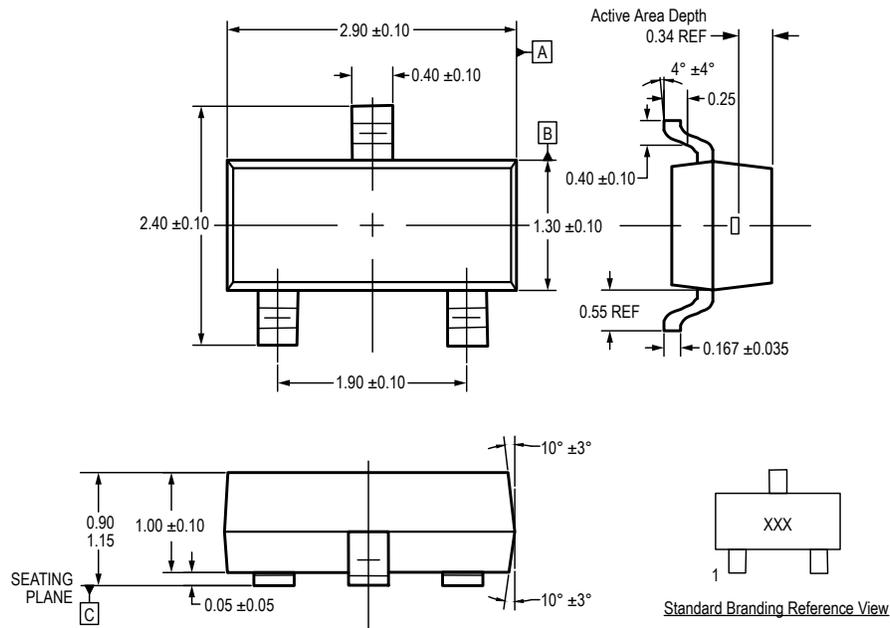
Package MD, 3-Pin SMD (SOT23-3)
